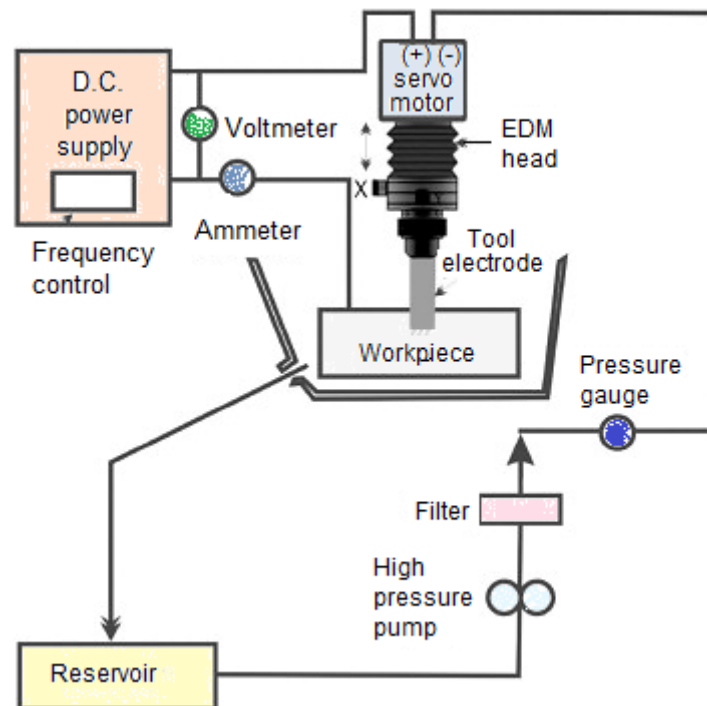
EDM cutting process in hard materials surfaces [91]
